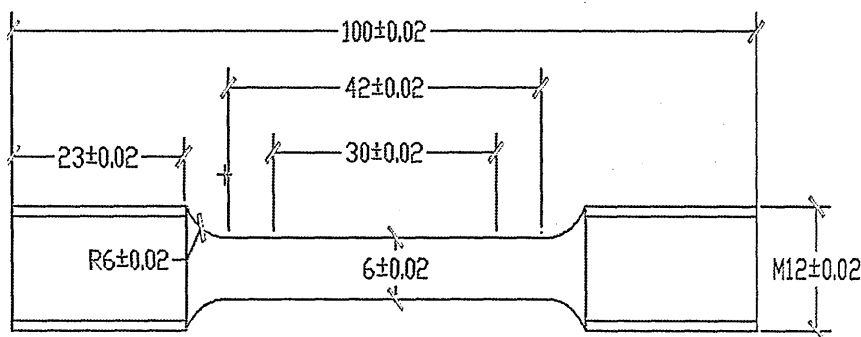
Tensile specimen geometry (schematic): all dimensions in mm.
